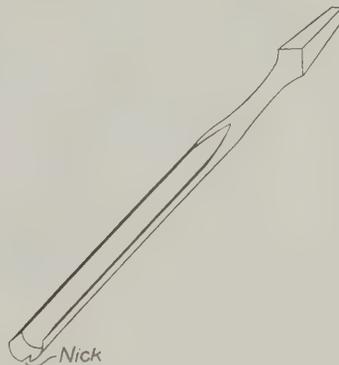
Bit with "Nick" for Removing Old Nails or Screws
